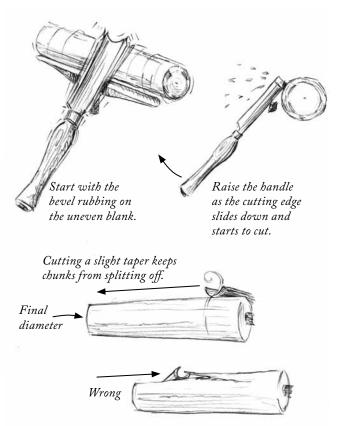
How to start roughing a billet and avoid removing large chunks.
